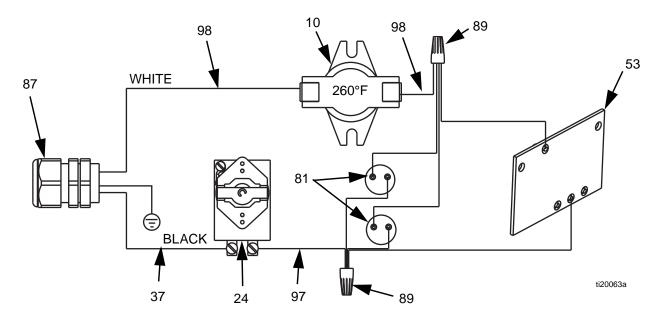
Electrical Schematic - 24P016, 24W248 Heater with Thermostat
